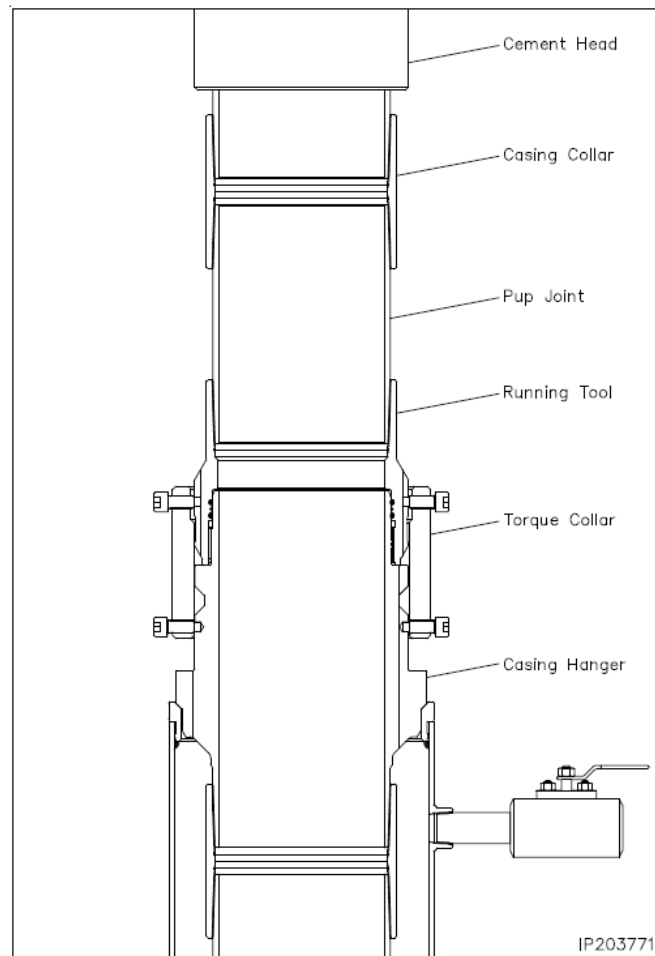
Cactus 13 3/8" 5M offline cementing tool. Pressure rating limited by the lesser of 5M tool rating or the 13 3/8" pup joint and casing.
